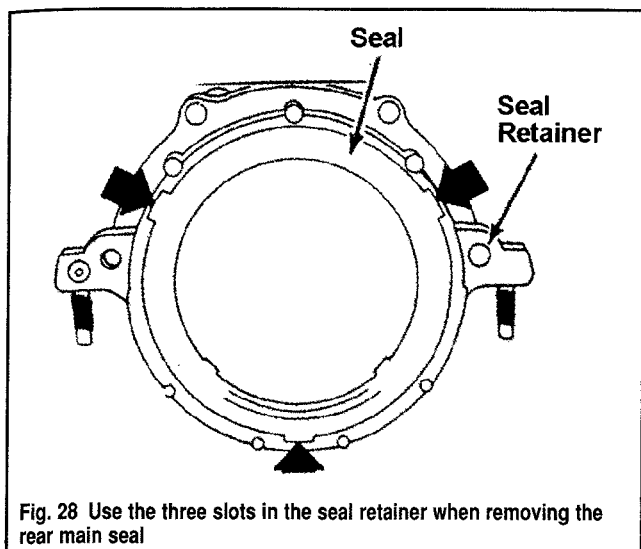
Use the three slots in the seal retainer when removing the rear main seal
